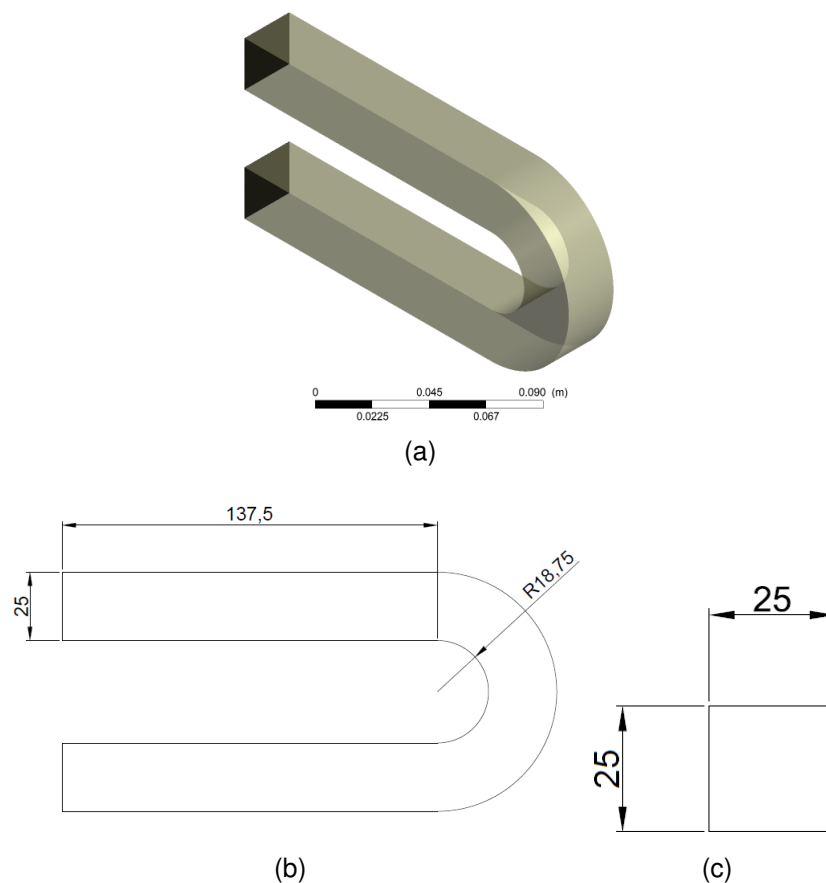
U-Bend geometry used in the present work: (a) Isometric view; (b) Longitudinal dimensions [mm] and (c) Transversal dimensions [mm].
